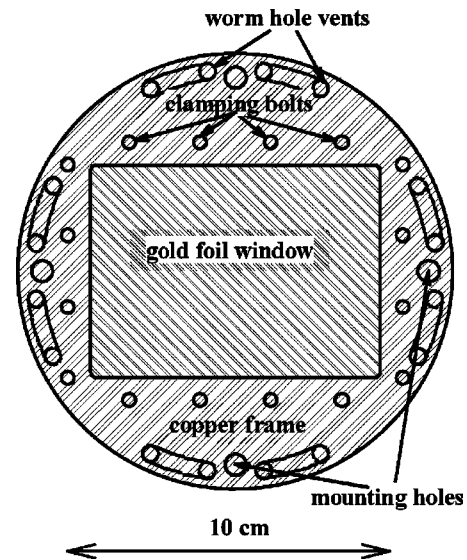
CAD drawing of frame for foil of the LHD IRVB.
